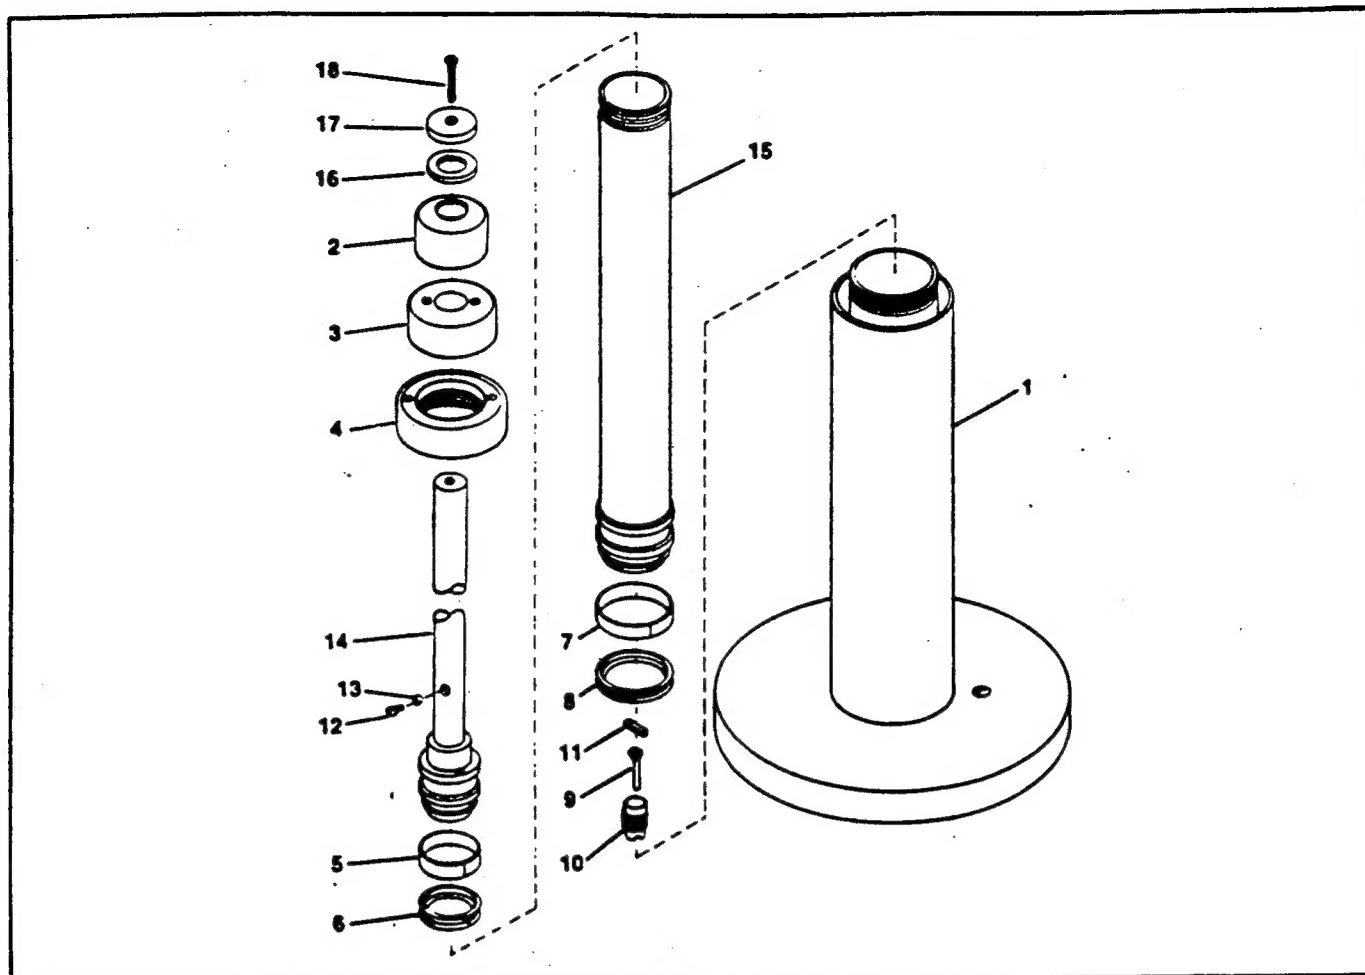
LIFT CYLINDER ASSEMBLY; UNITS SHIPPED AFTER 7/77
